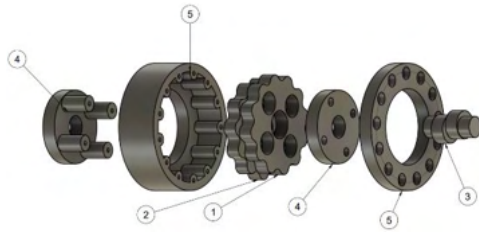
Gear Bearing. (1) and (2) Cycloidal Disks, (3) Input Shaft, (4) Output Shaft, (5) Ring Gear Bearing.
